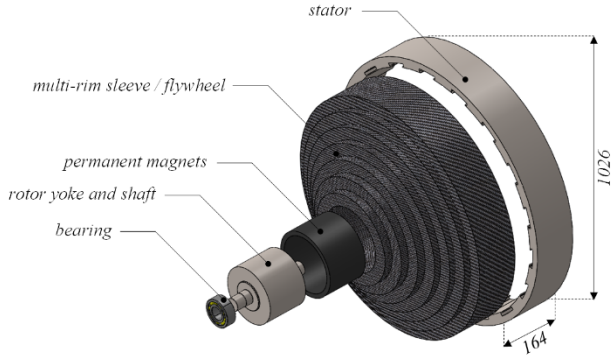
view of the high-speed FESS (main dimensions expressed in mm).
